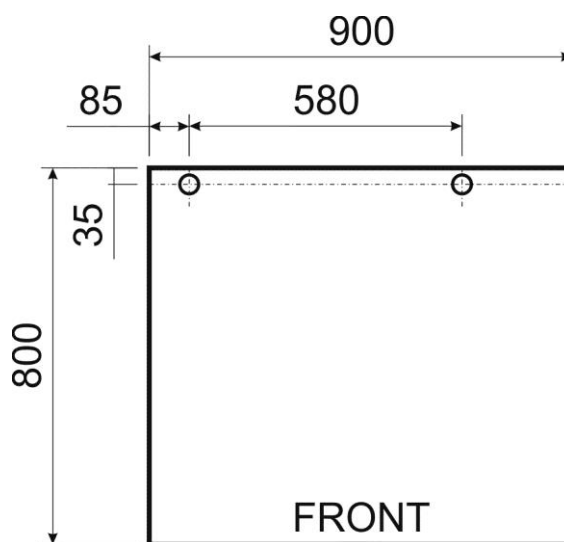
Top view. Position of the two drain ducts, upper part, top view of the machine. Dimensions in mm.
